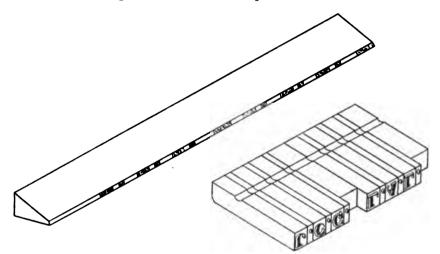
Grantype; individual-type line closed up and ready for galley. Enlarged.
